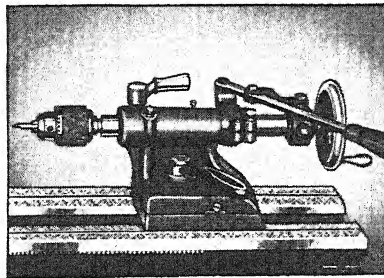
A Drill Chuck Carrying a Combined Drill and Countersink.
